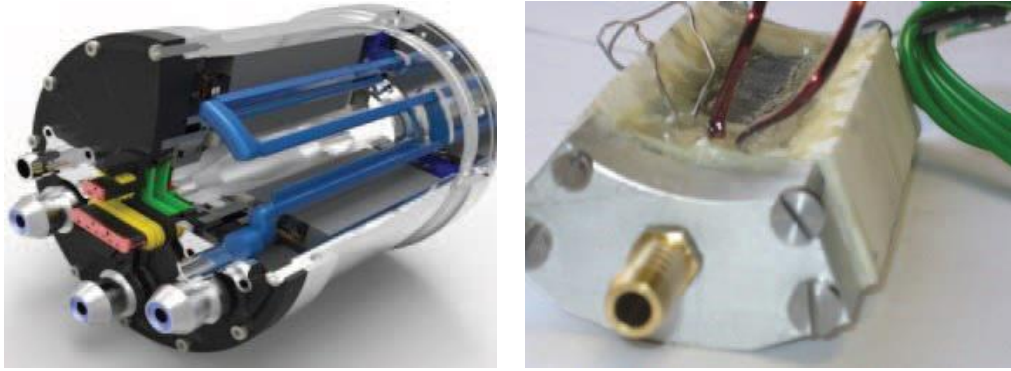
Slot duct cooling for the whole motor (left) and single teeth prototype (right) [55].
